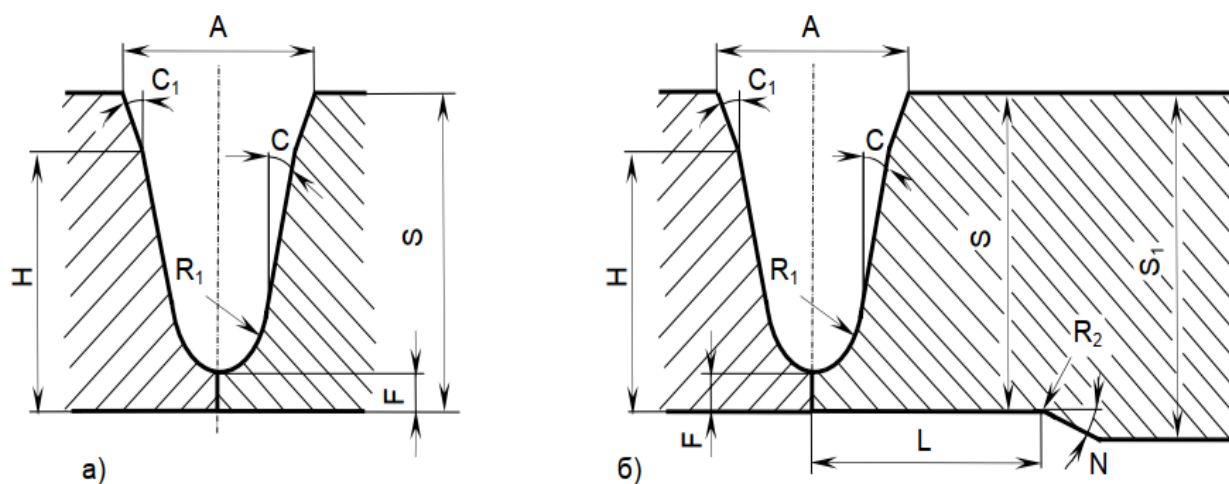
Geometric parameters of edge cutting and assembly of pipe joints for CWS.02 welding: *a* - connection of pipes of the same wall thickness;
